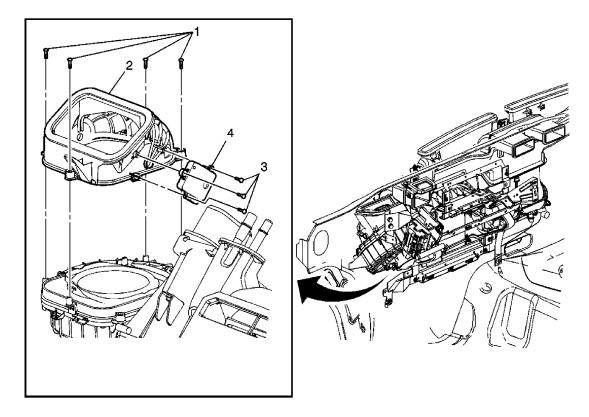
Recirculation Actuator Replacement (Right Hand Drive) Courtesy of GENERAL MOTORS CORP.
